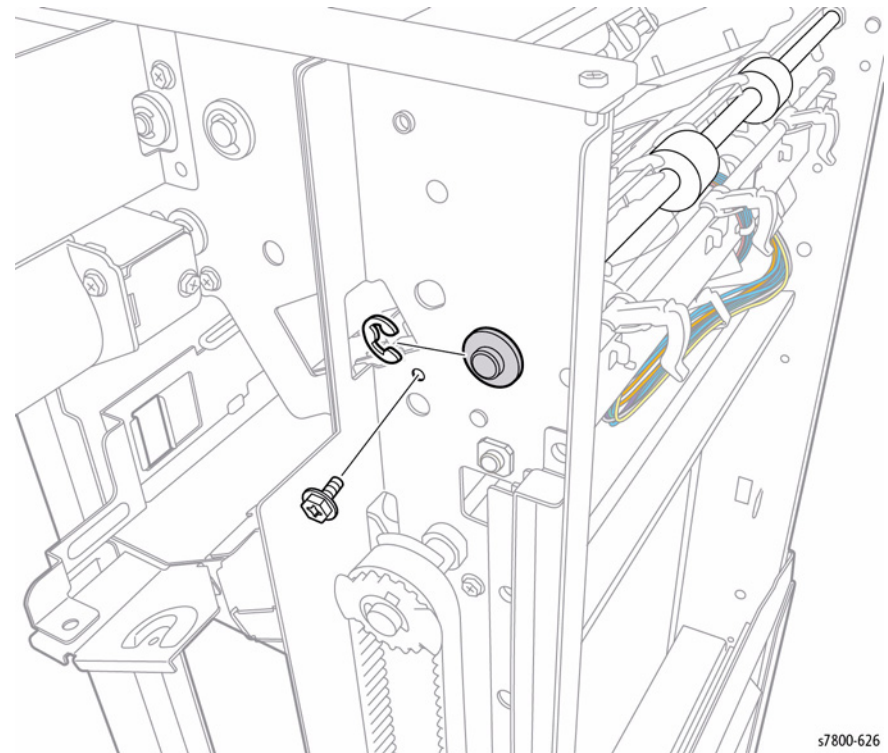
Removing the Front E-Clip, Bearing, and Screw
